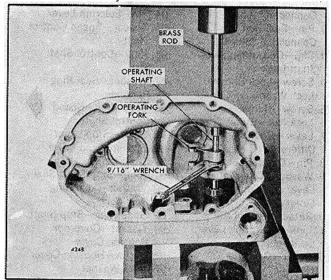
Removing Operating Fork, Shaft and Lever Assembly from Governor Housing
